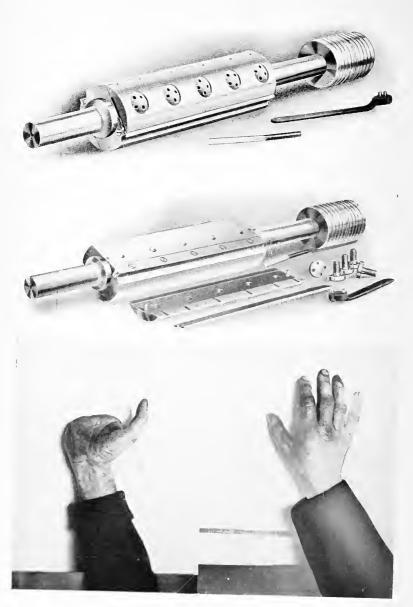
Fig. O. — Upper illustrations show circular safety cylinder; lower left, view of hand injured by old-fashioned jointer; lower right, view of man's hand injured by circular jointer. (Courtesy of the American Museum of Safety, New York.)
